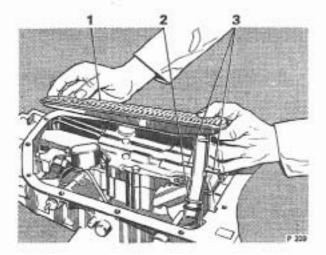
REMOVING INTAKE PIPE AND FILTER ASSEMBLY
